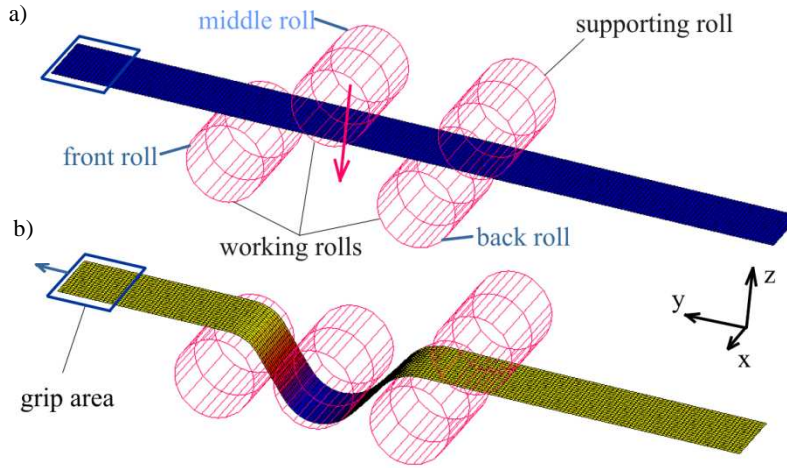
Geometry of FEM model of drawbead simulator test: a) initial configuration, b) start of drawing stage
